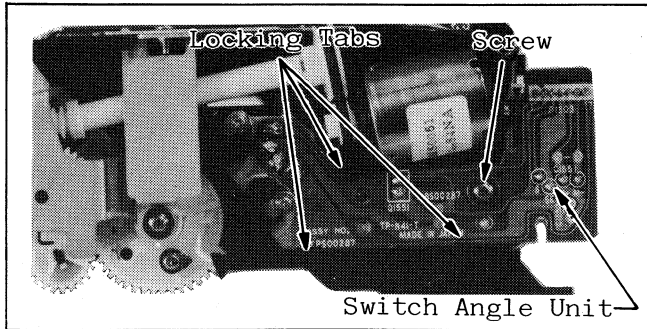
Adjustment of Cassette Up Gears-(6)
